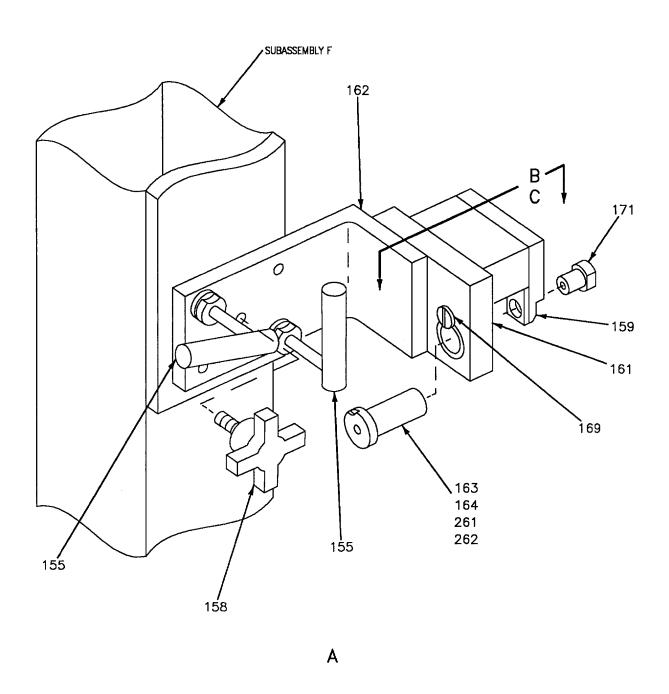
Bushing Replacement At XW153.090 Outboard Hinge Point (Sheet 2)
